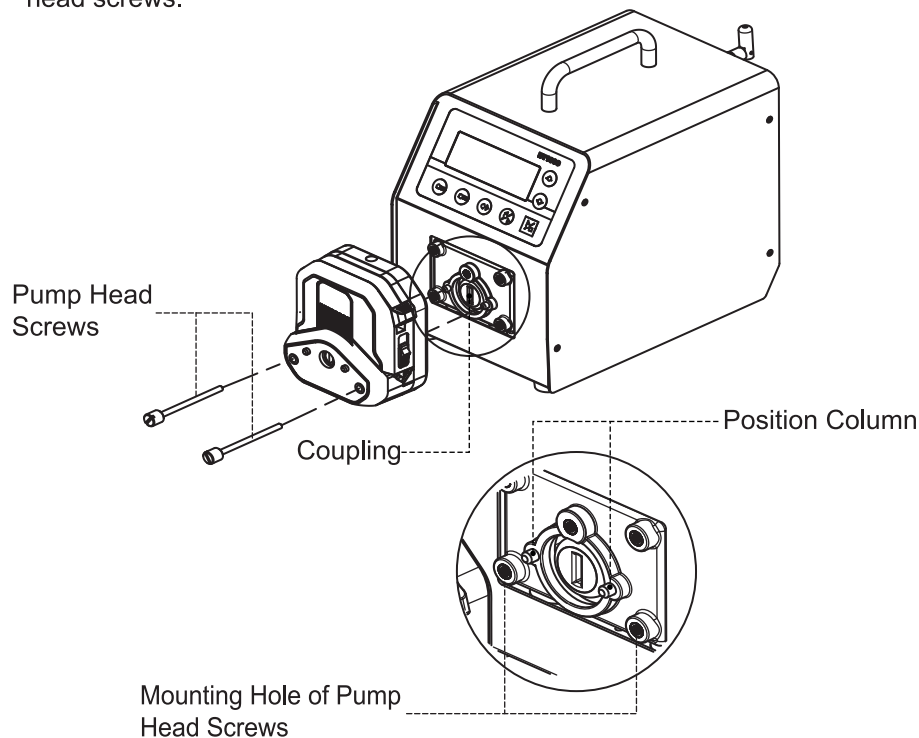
Assembly Drawing of YZ15T/YZ25T Pump Head
